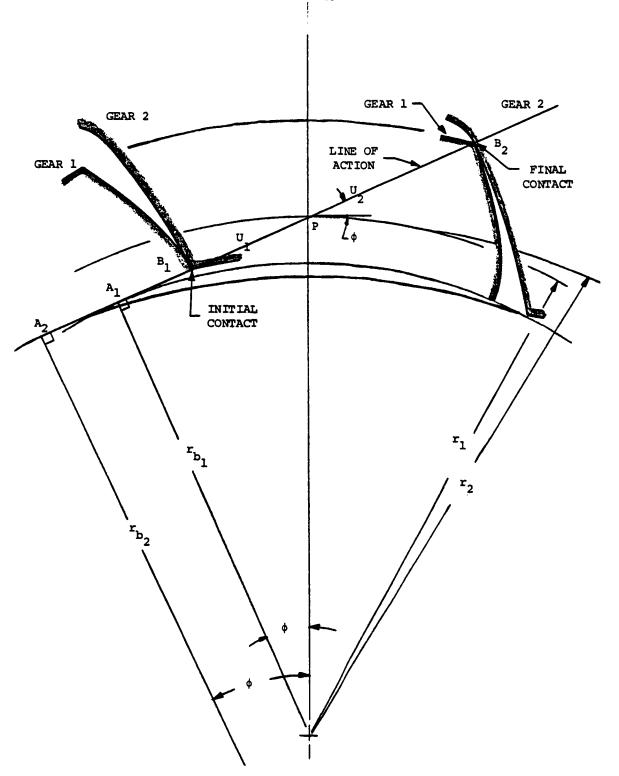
Initial and Final Points of Contact, and Line of Action of an Involute External-Internal Gear Pair
